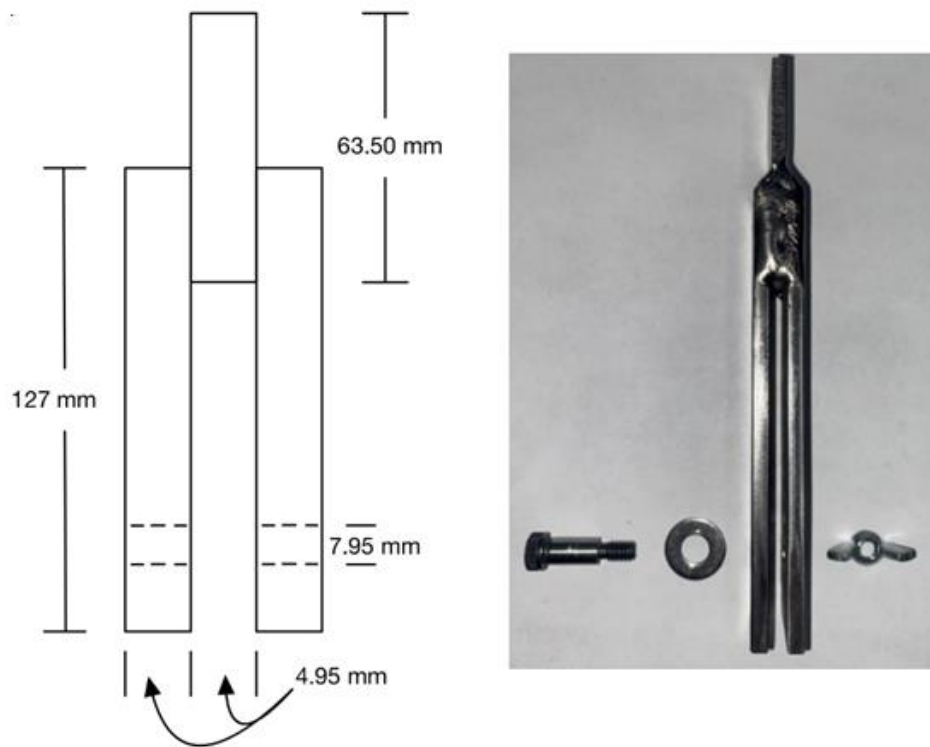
Steel adapter used to apply pin loading: (left) adapter schematic and (right) actual adapter with shoulder bolt.
